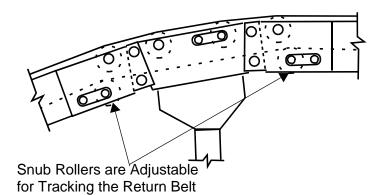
Adjusting Upper Bend Snub Rollers for Tracking the Return Run of Belting
